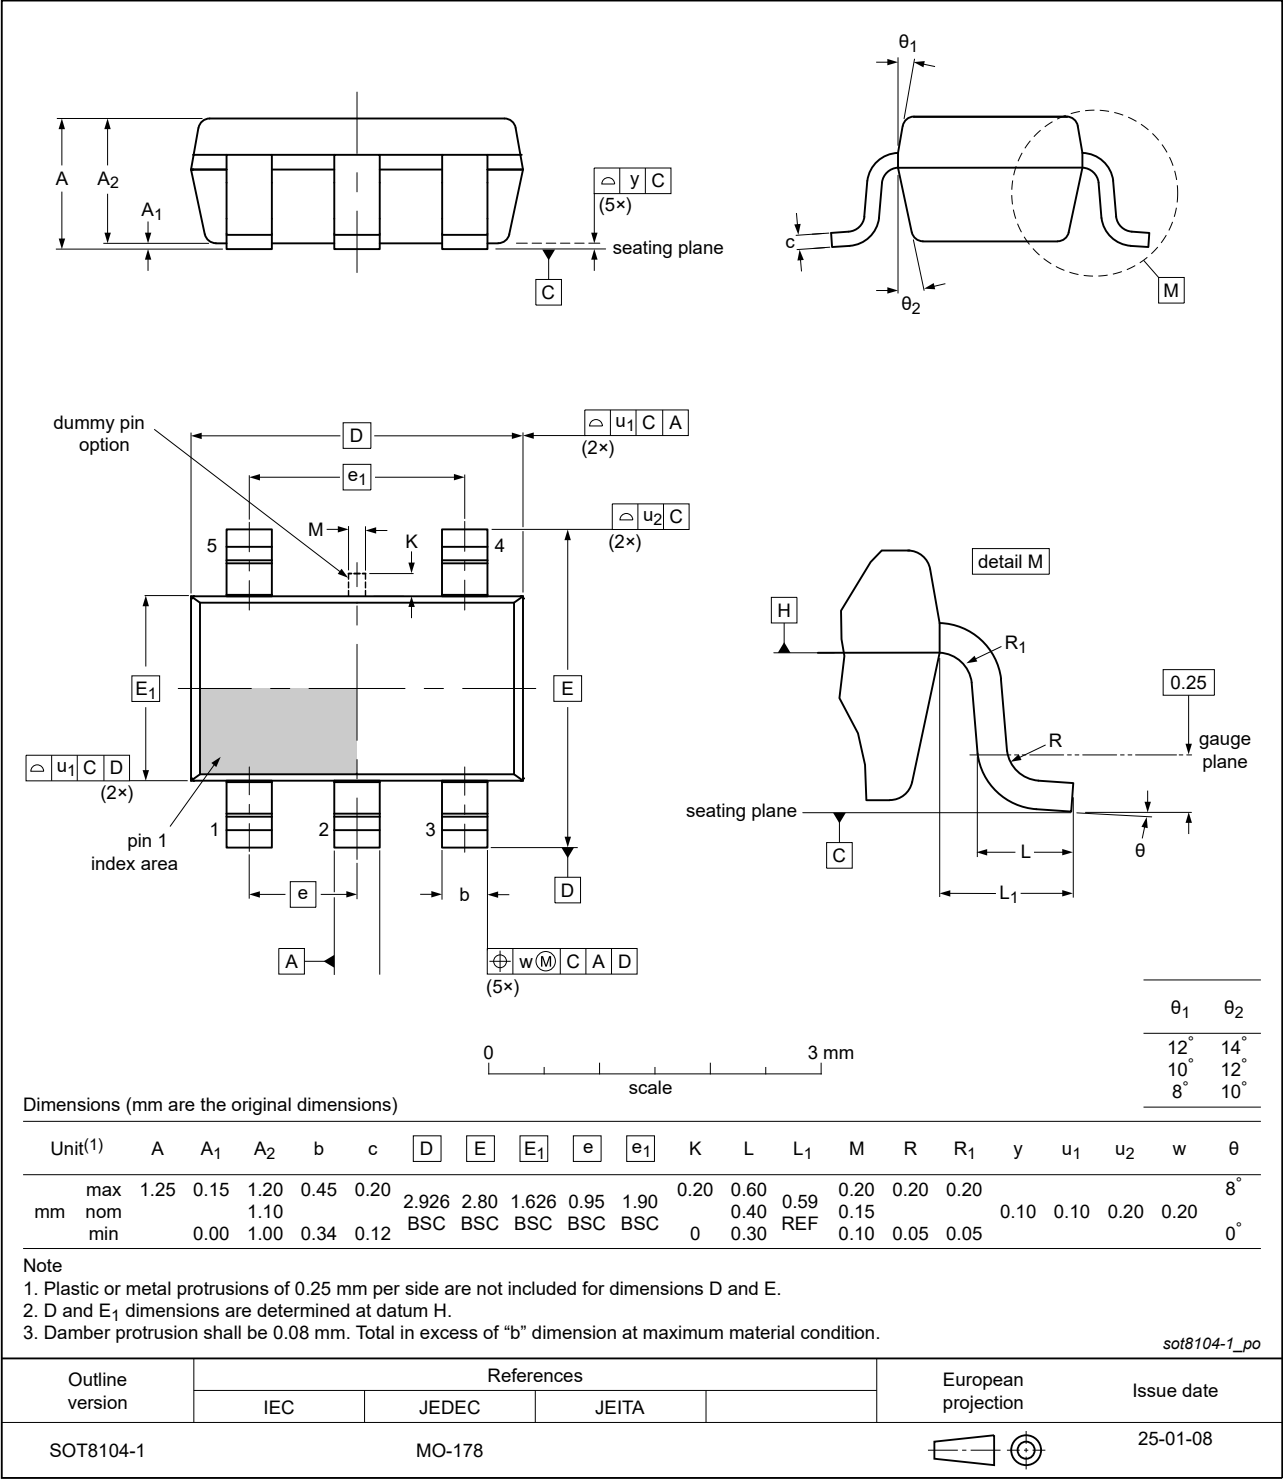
Package outline SOT8104-1 (SOT23-5)
